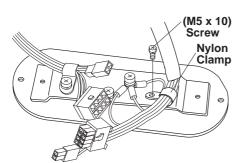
B Attaching Balance Arm Cable on Bottom Cover
